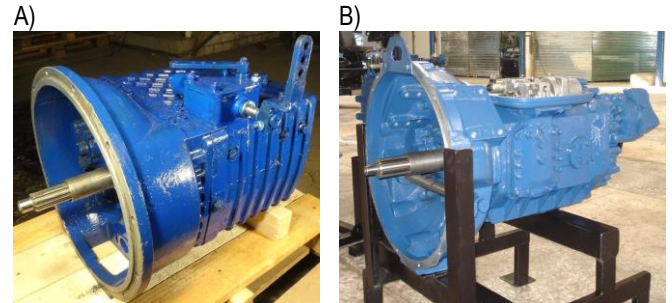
Experimental samples of gearboxes: A) M6-700 b) TM8-2700
